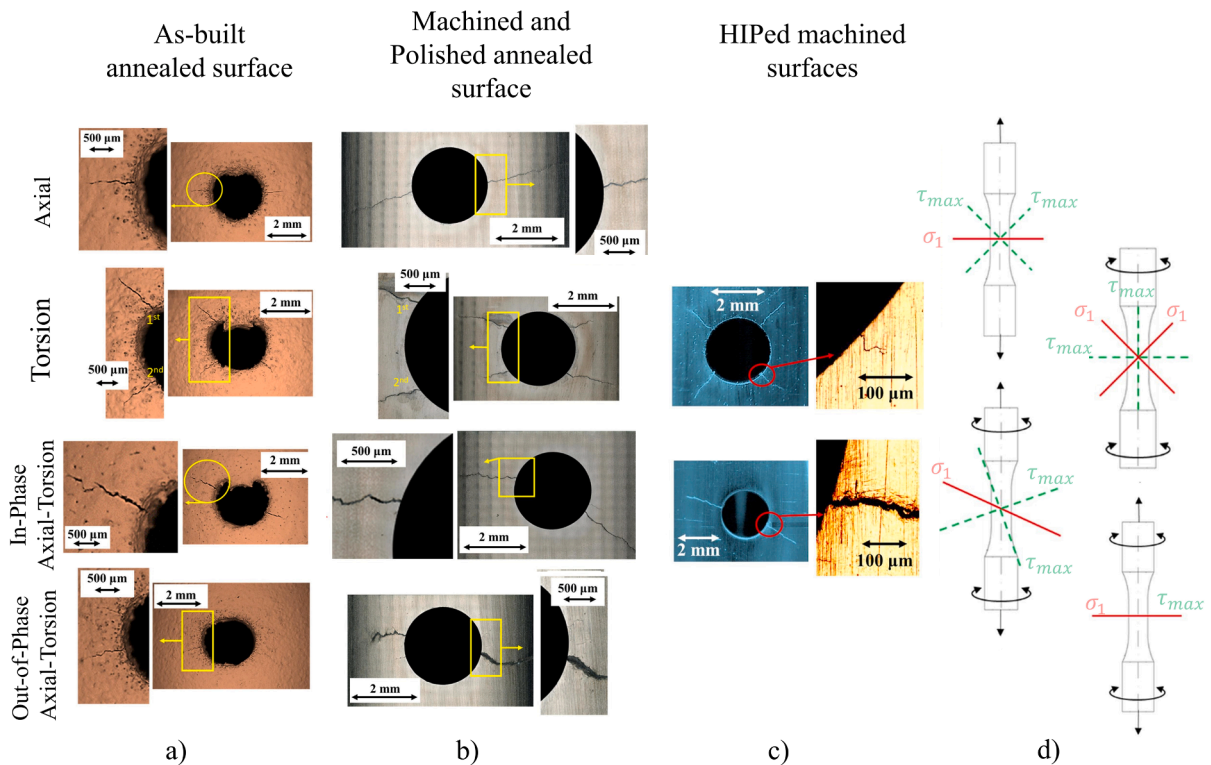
Crack paths of notched LPBF Ti6Al4V specimens under different loading conditions for (a) as-built annealed surface, (b) machined and polished annealed surface, and (c) HIPed machined surface; d) maximum principal plane and maximum shear plane directions. Figure adapted from [208,223].
